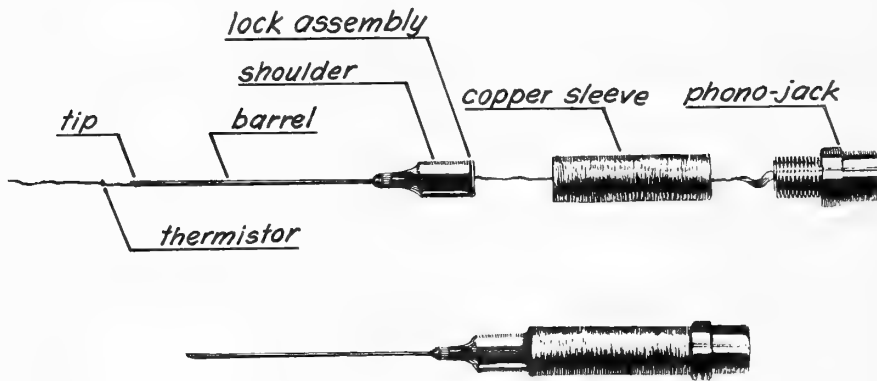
Thermistor probe assembly, blown-up illustration with finished probe below.
